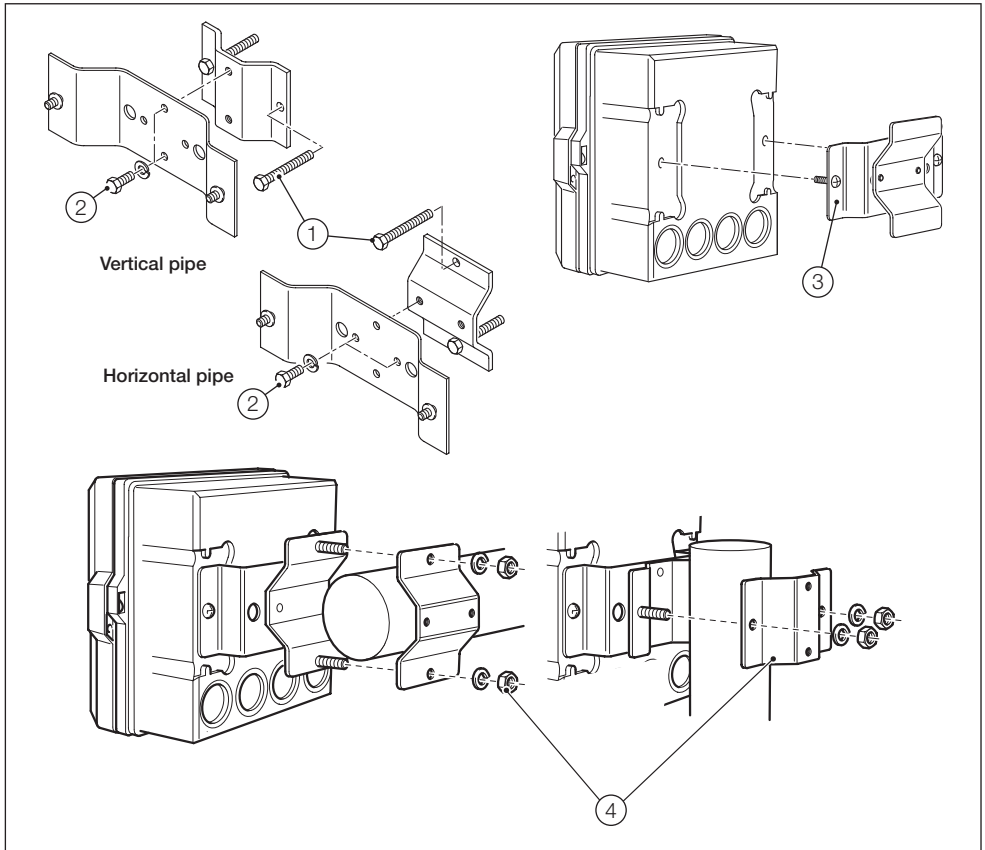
Installing the Instrument – Pipe-Mounting (Optional)
